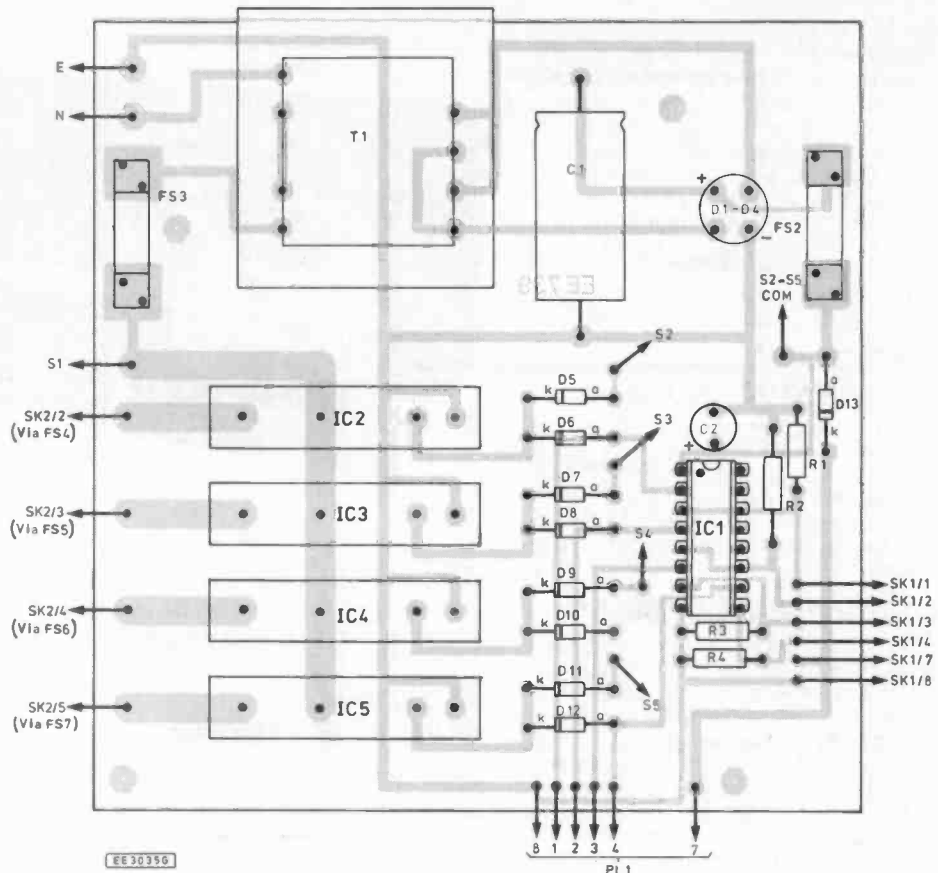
(above) Printed circuit board component layout and (right) full size copper foil master pattern for the Switched Power Output Module.
